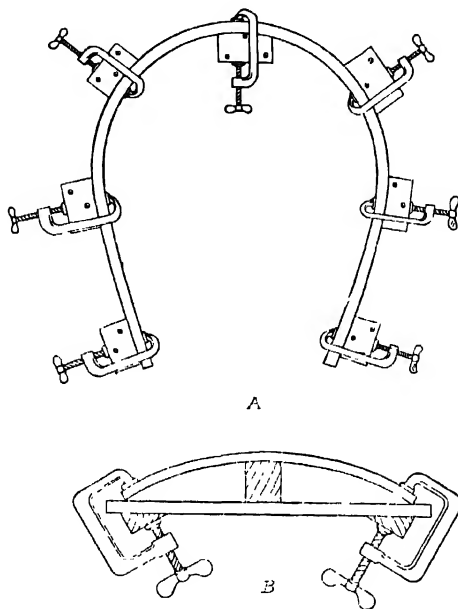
Bending jigs A, Bow bending jig, B, Combination bending jig.
